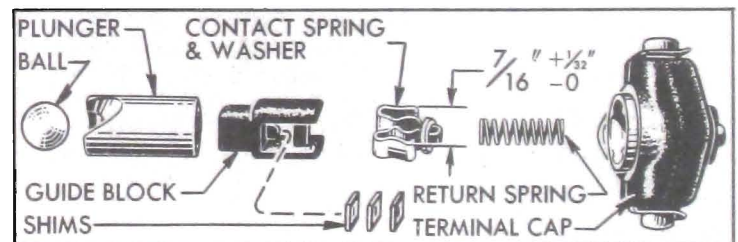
Carter Accelerator Vacuum Switch Parts
